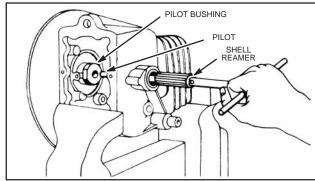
REAMING MAGNETO BEARING (SHELL REAMER)
